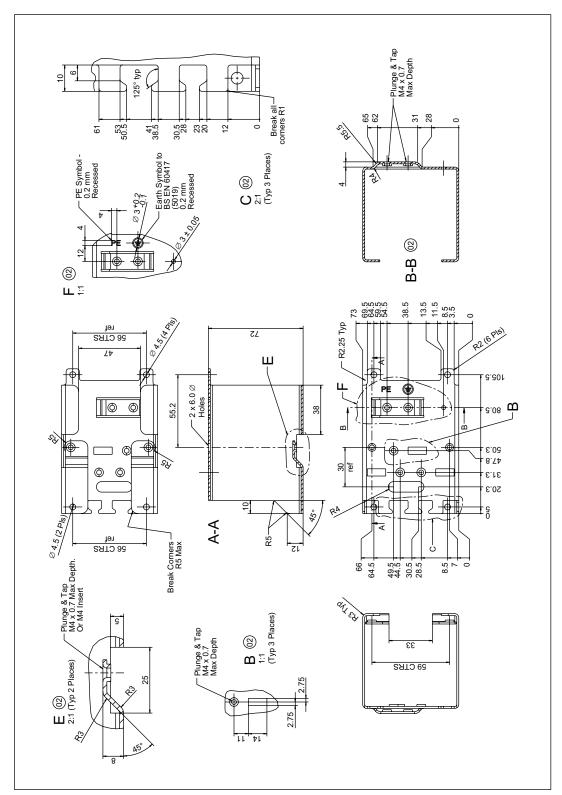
Dimension drawing: Screening Kit, frame size FSA
